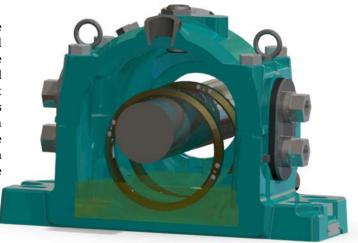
Oil rings rely on shaft rotation to deliver oil to the bearing.
